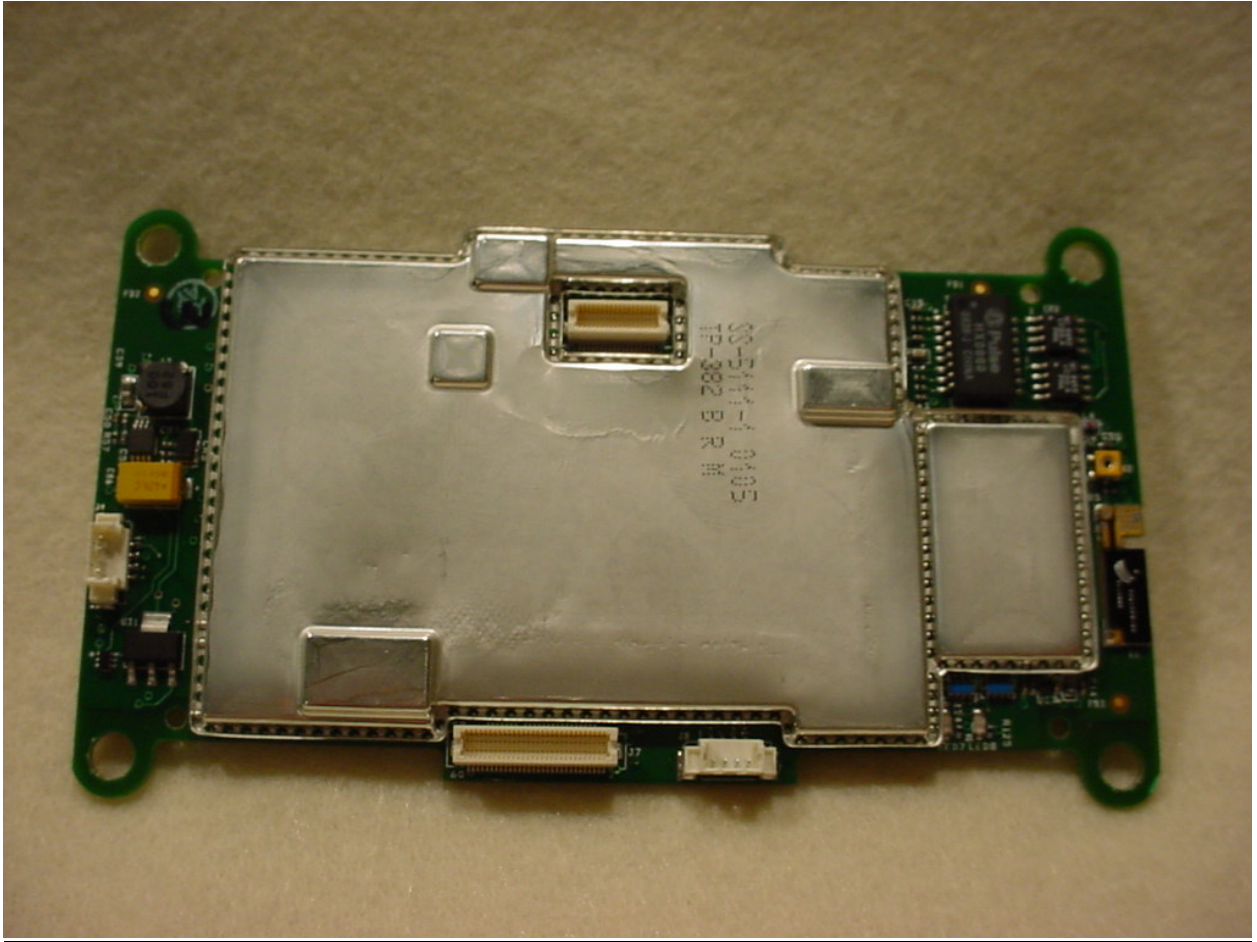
Internal – Cell Relay Core Board Front (Shielded)
